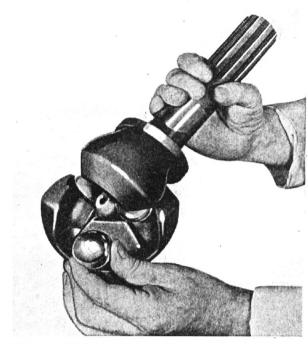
ASSEMBLING UNIVERSAL JOINT BALLS
